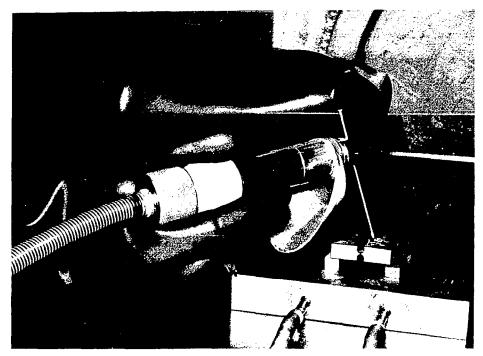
Torch and Internal Chamber Arrangement for Manual Plate Welding
